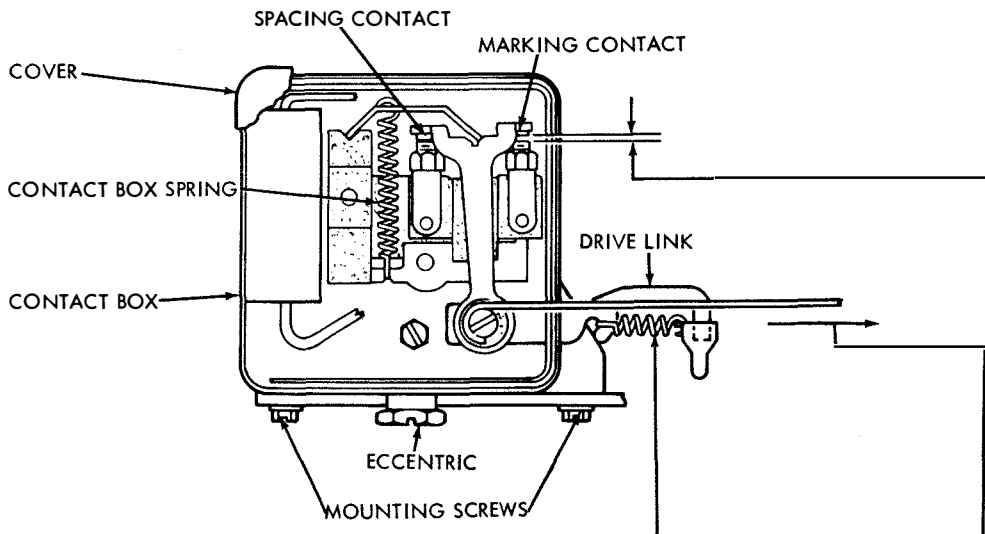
Signal Generator Clutch (TT-253/UG, TT-253A/UG, and TT-292/UG)
